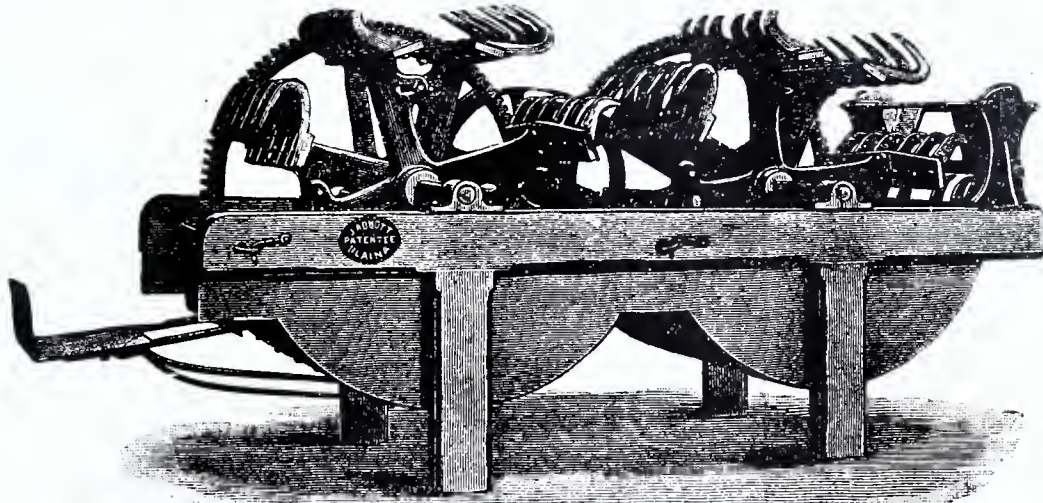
The Abbott Tin Plate Cleaning Machine.
